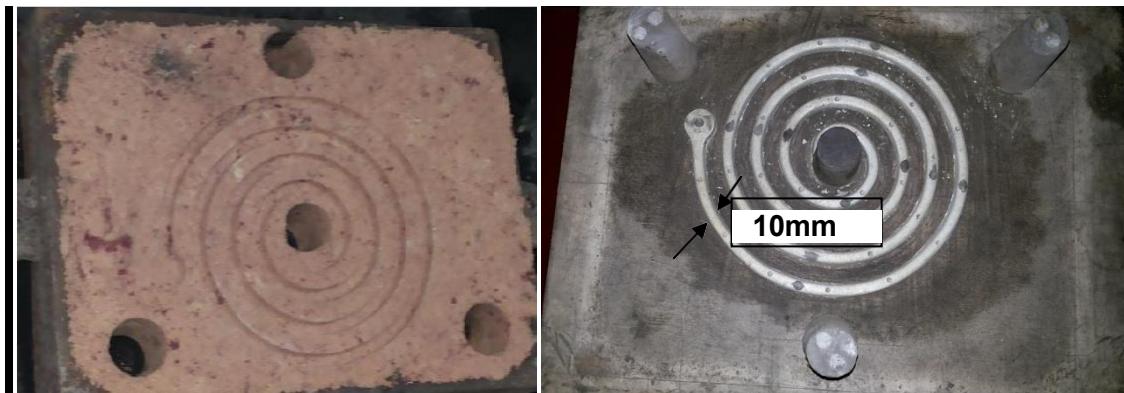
Spiral-shape pattern and CO₂ sand mold
